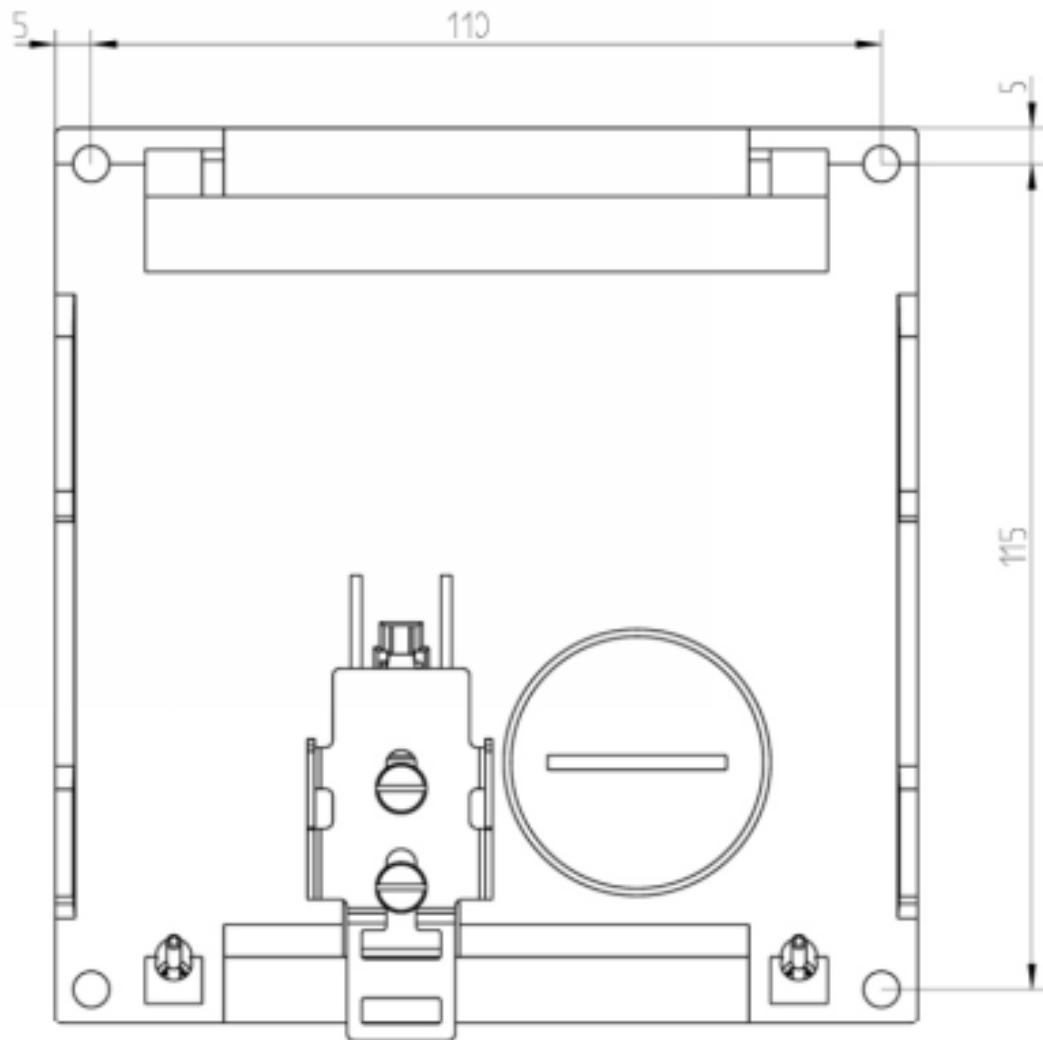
Dimension drawing SCALANCE X216, X212-2 and X212-2LD
